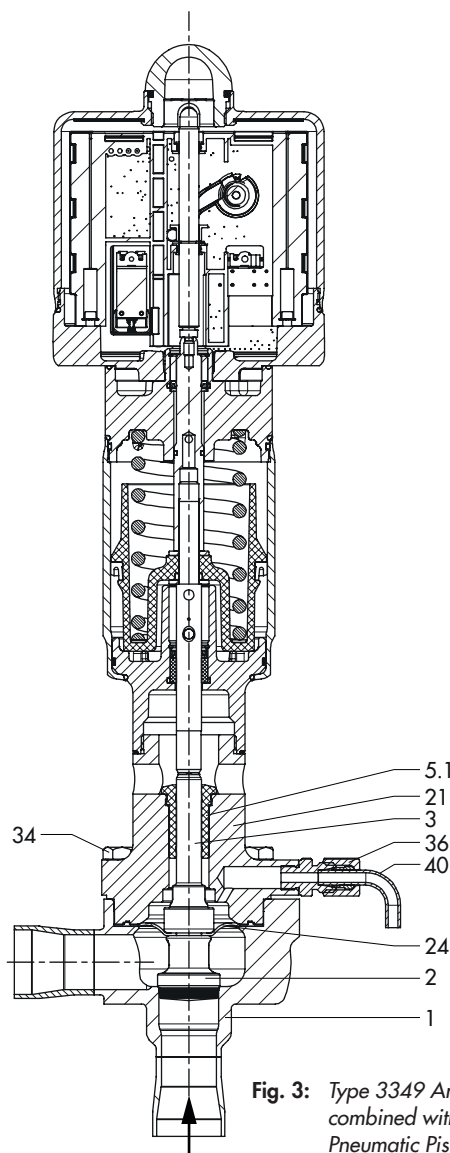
Type 3349 Angle Valve combined with Type 3379 Pneumatic Piston Actuator and Type 3724 Positioner
